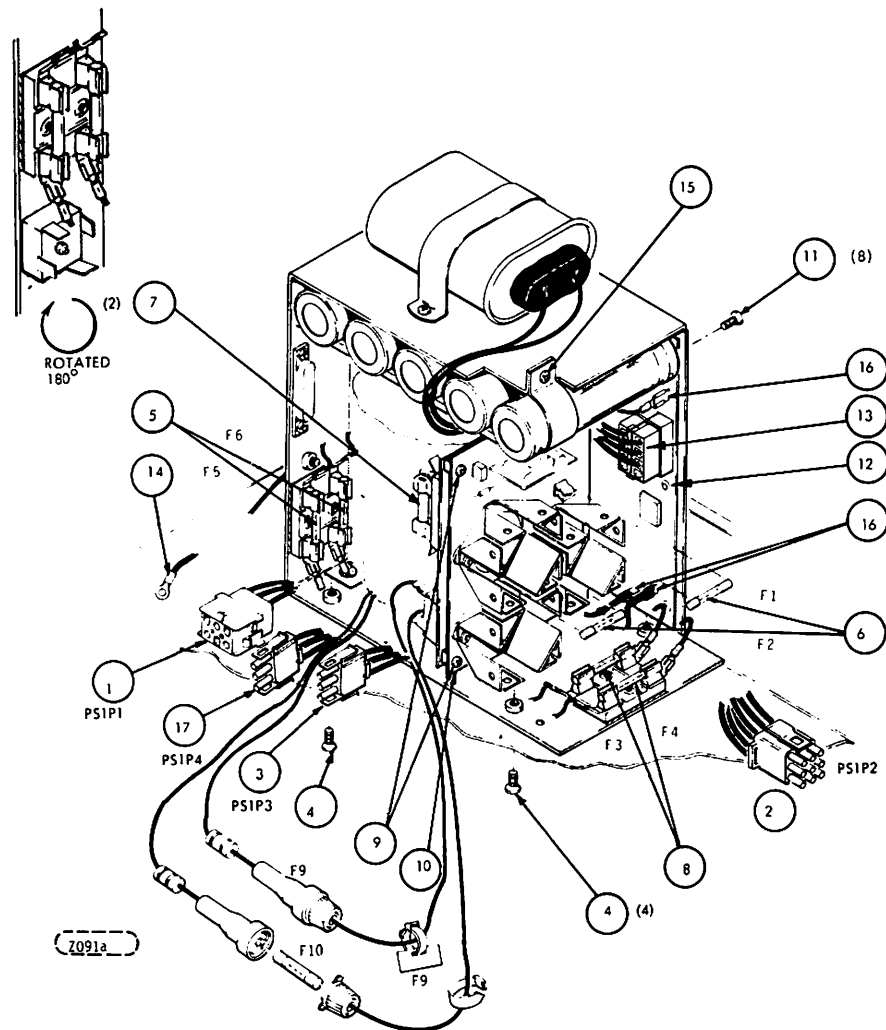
POWER SUPPLY ASSEMBLY
